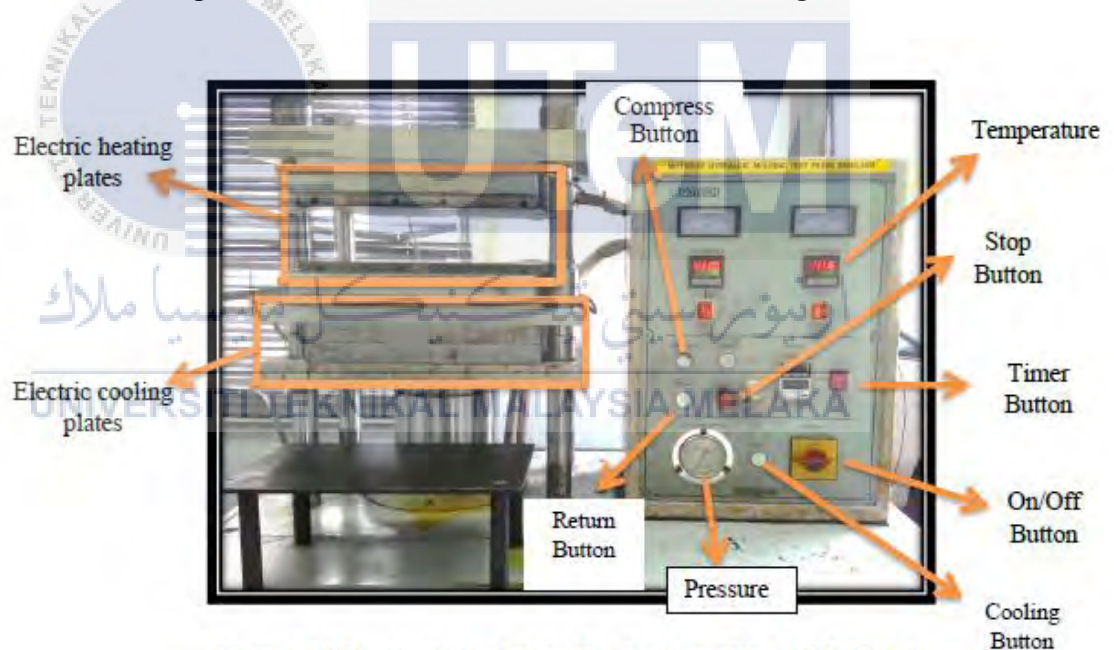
Motorise Hydraulic Molding Test Press Model-GT-7014-A
